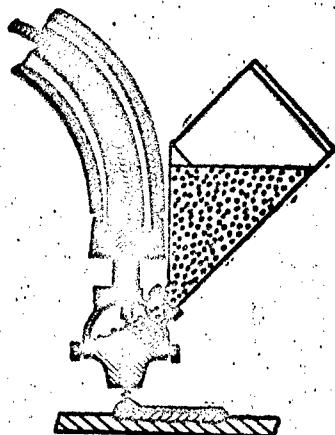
Welding System with a DShM-3 Adapter in Low Position.
